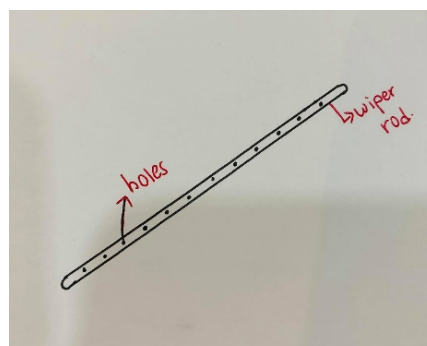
Hand sketch of the wiper rod for the smart wiper washing system
